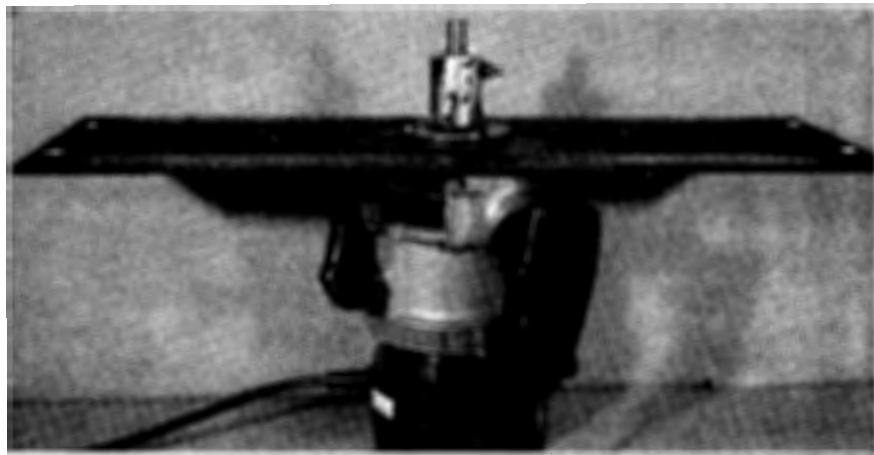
ASSEMBLY OF EXTENSION SHAFT HOUSING
